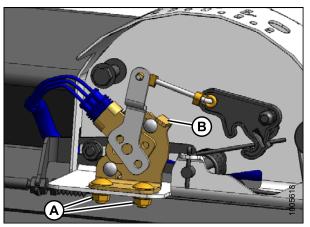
Auto Header Height Sensor Assembly for Use with Lexion Combines
